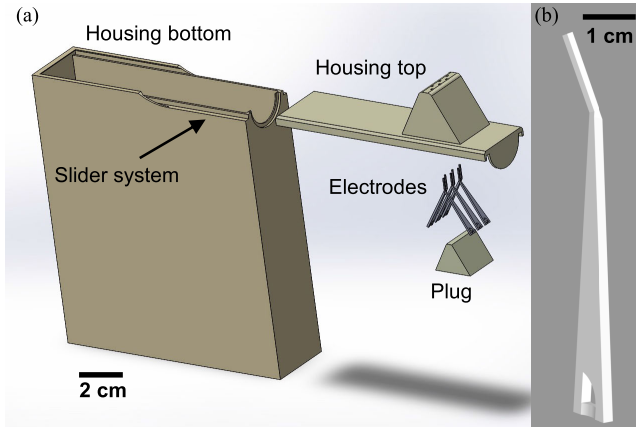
(a) Computer-aided design (CAD) exploded view of an MLP. The driving electronics are inside the housing bottom. The housing top and bottom are assembled using a slider mechanism. (b) CAD close-up of an LP electrode used in the MLP.
